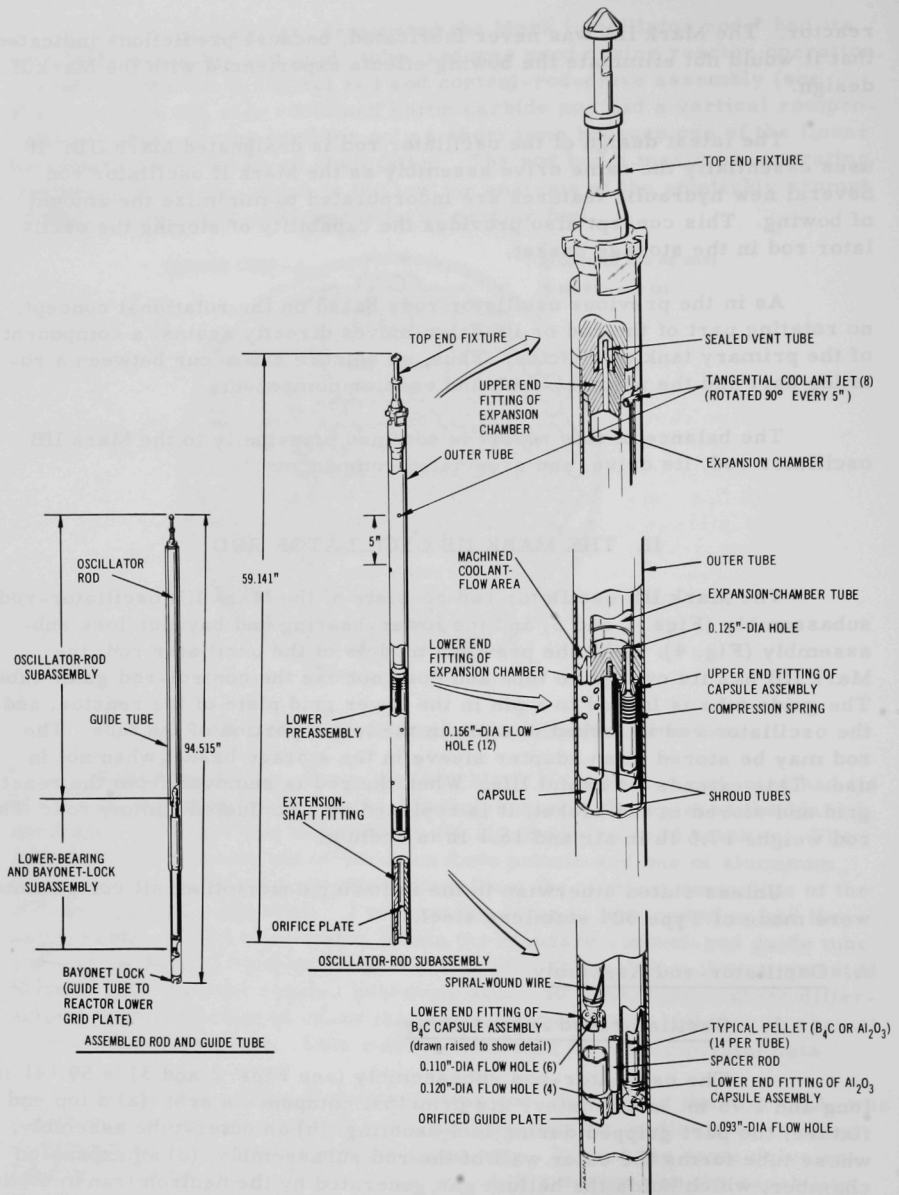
General Configuration of Mark IIB Oscillator Rod
